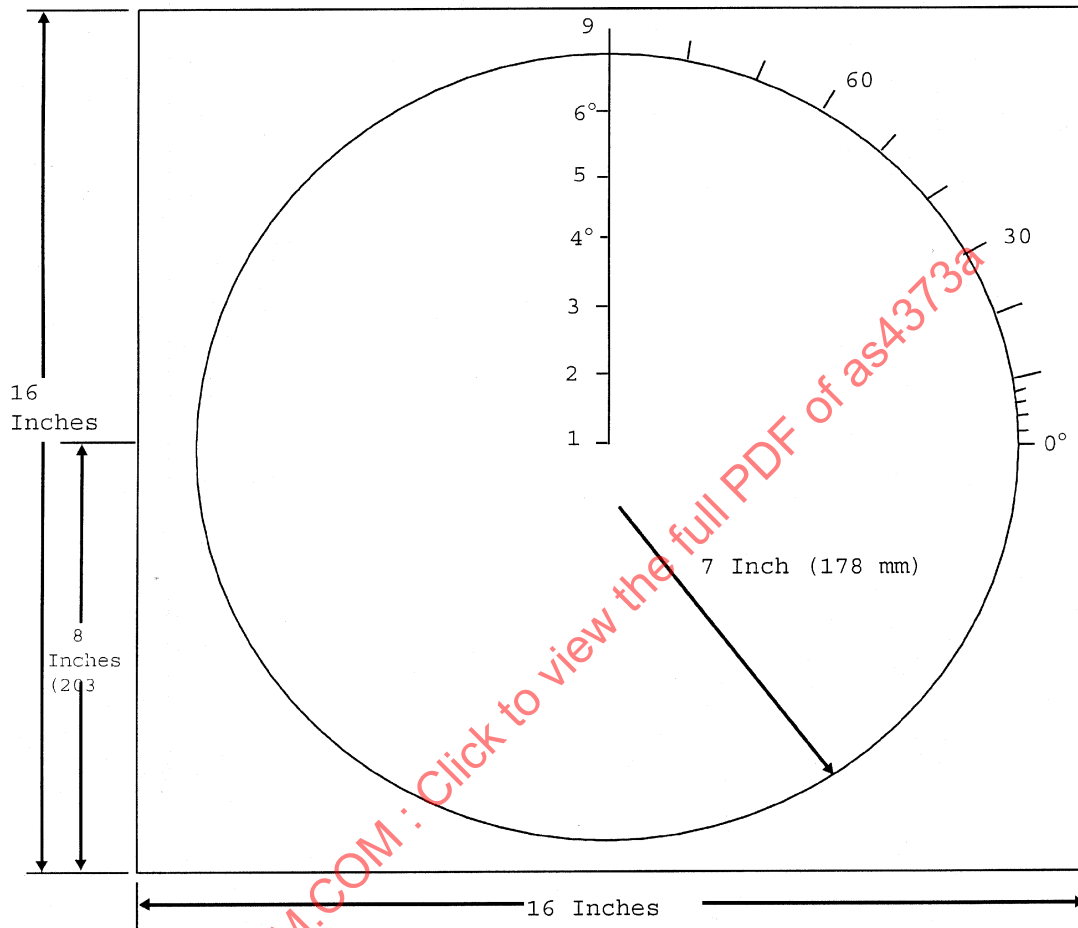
Stiffness and Springback Fixture Base Plate
